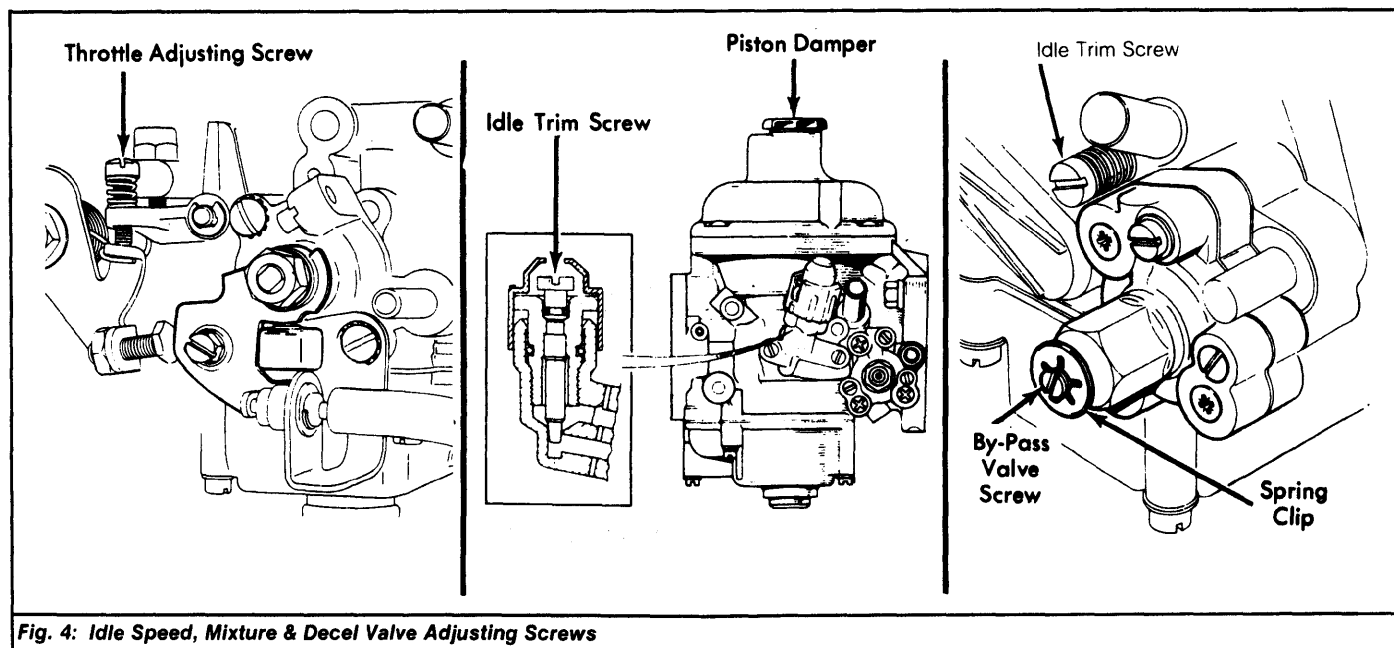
Idle Speed, Mixture & Decel Valve Adjusting Screws
